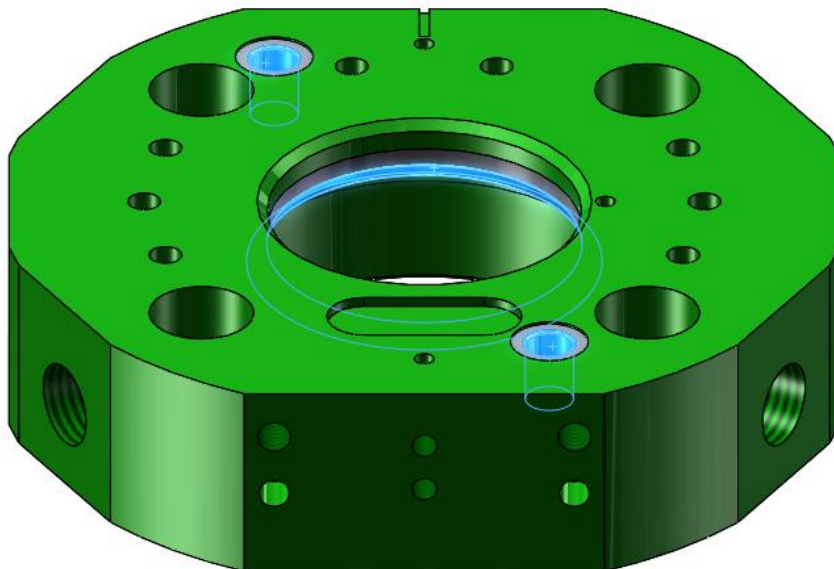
ET63 Tool Side Lubrication
